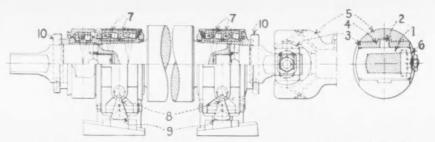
Section Showing Bearings for the Bottom Roll, the Lengthening of Old Rolls, and the Universal Coupling
